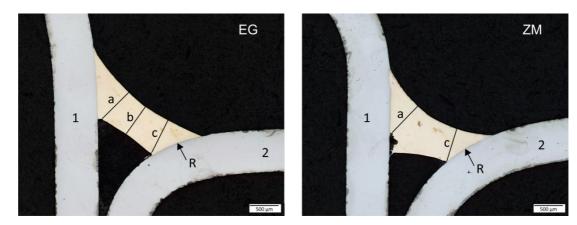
Micro-sections of laser brazed joints on EG and ZM coated steel: 1 - upper joining partner; 2 - lower joining partner; R - outer joining radius; minimum of a,b,c – minimum wetted length.
